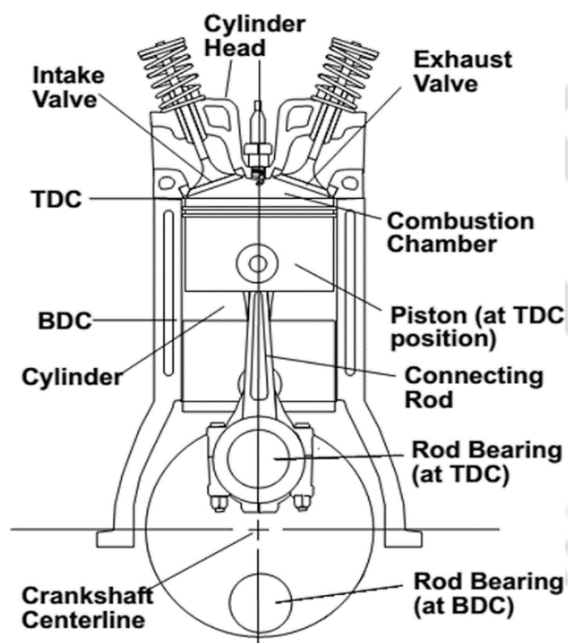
Representing the Cross-section of a spark-ignition engine [Springer Link].
